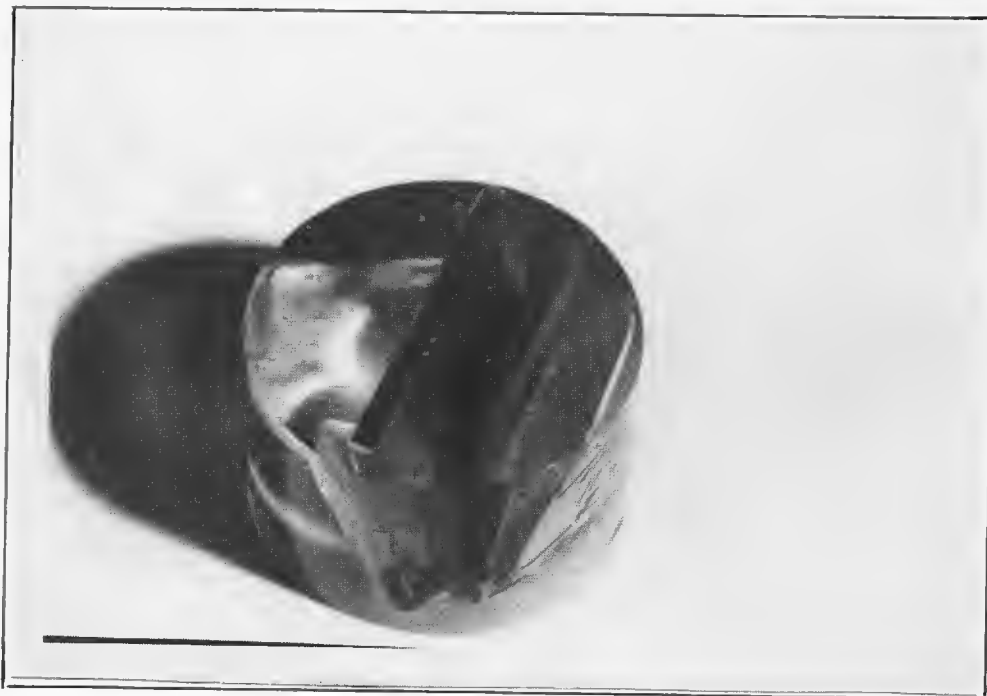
Fracture Edge; note thinning (on right-hand sample towards front) and slope of fracture edge.
